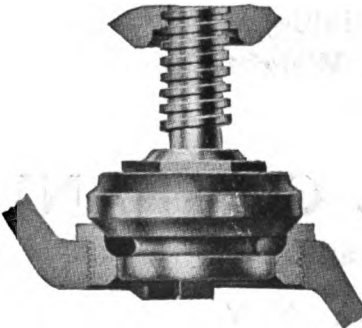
The valve closed. The unscored seats form a leak-proof joint.
